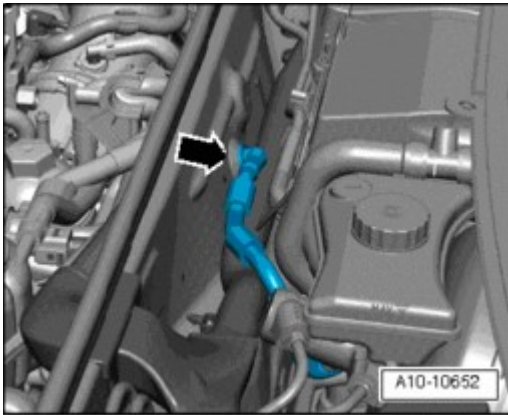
Identifying Air Hose, Mass Air Flow Sensor & Bolts
